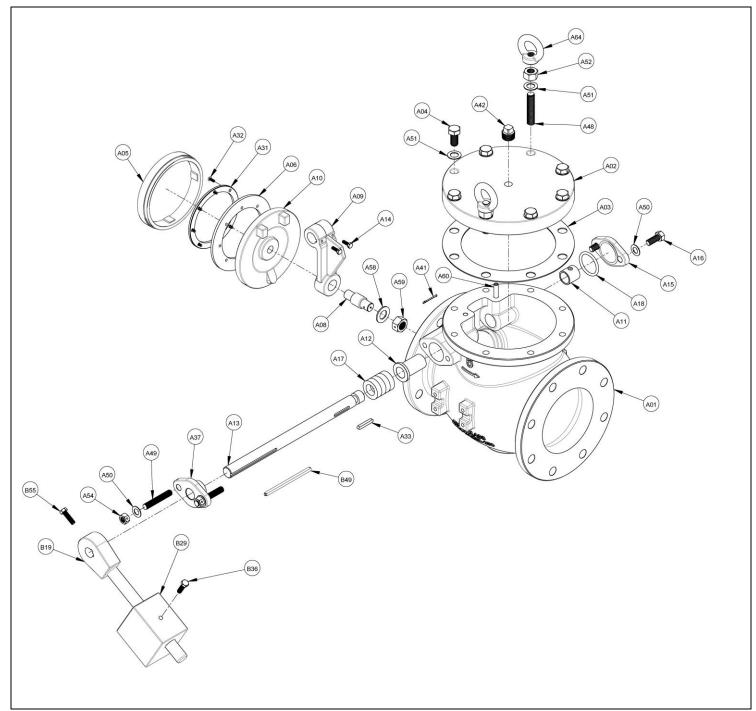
CVS-250/250A Swing Check Valve (Lever & Weight)
